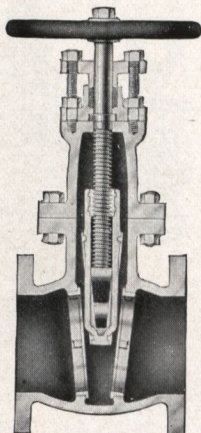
Flanged Inside Screw—Stationary Spindle
